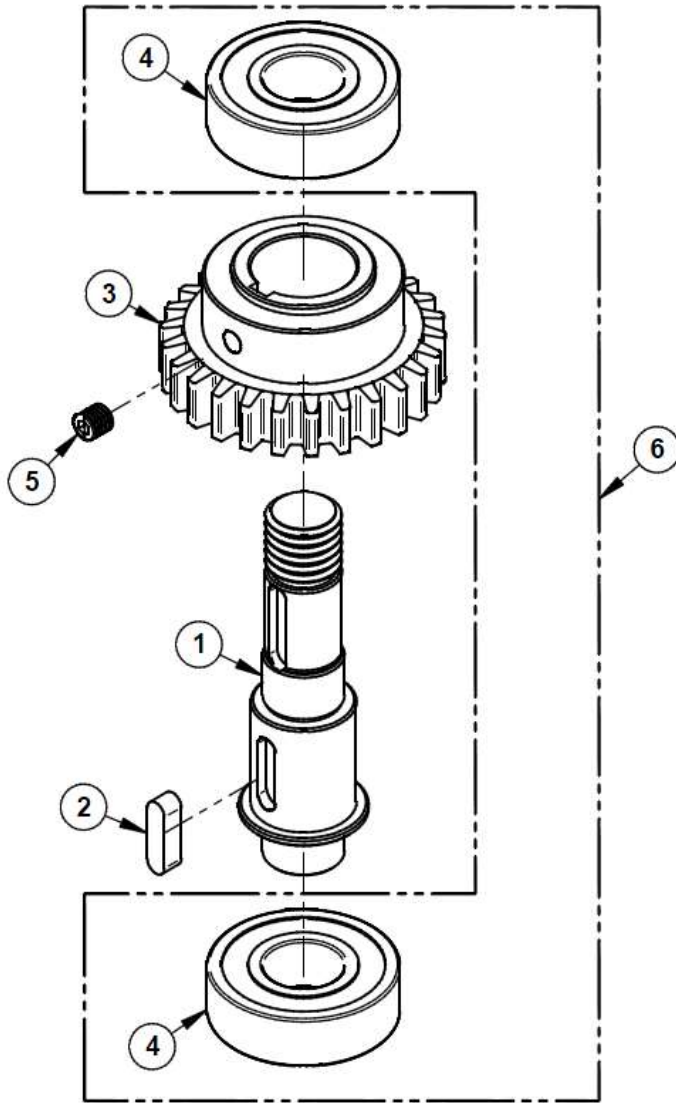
& Parts List Shown – K2EMX, K3EMX & DPMEX2 –
